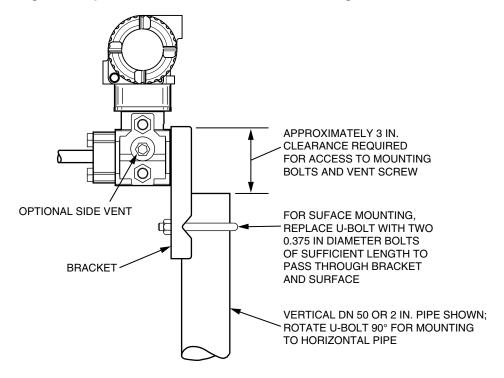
Examples of Transmitters Mounted with a Standard Bracket
